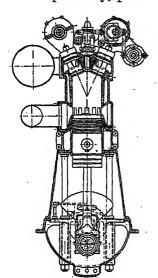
Early Type of Sulzer High-speed Marine Diesel Engine,
